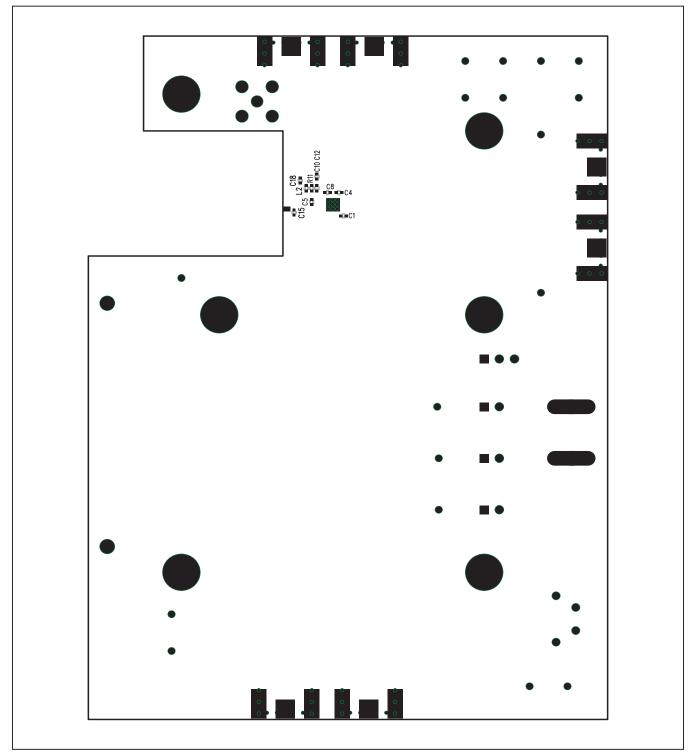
MAX3711 EV Kit Component Placement Guide—Solder Side
